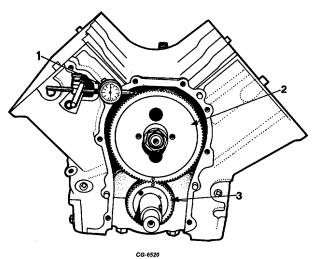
Checking Camshaft and Crankshaft Gear Backlash
